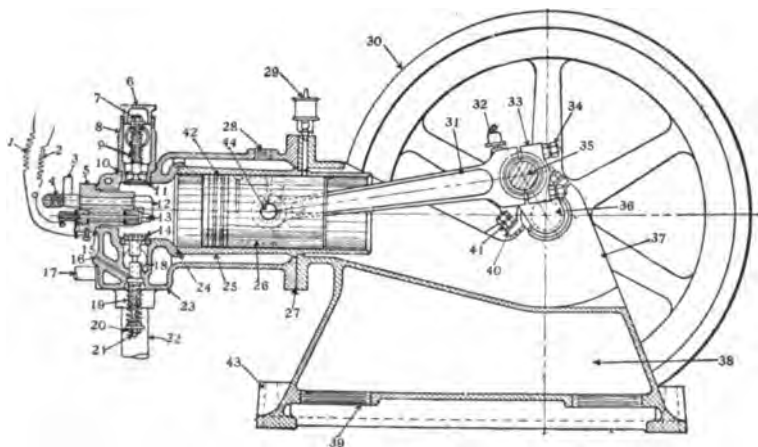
Jacobson Hit-and-Miss Engine.
